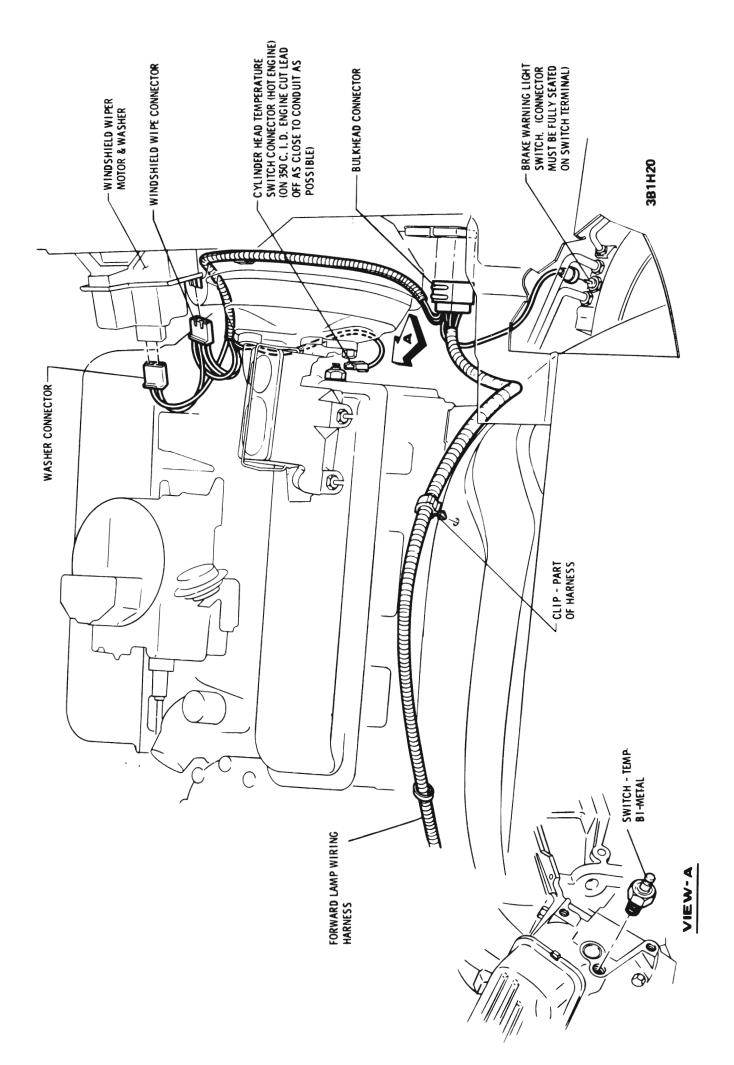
H-20 Cylinder Head (HOT ENGINE) Indicator 455 Engine
